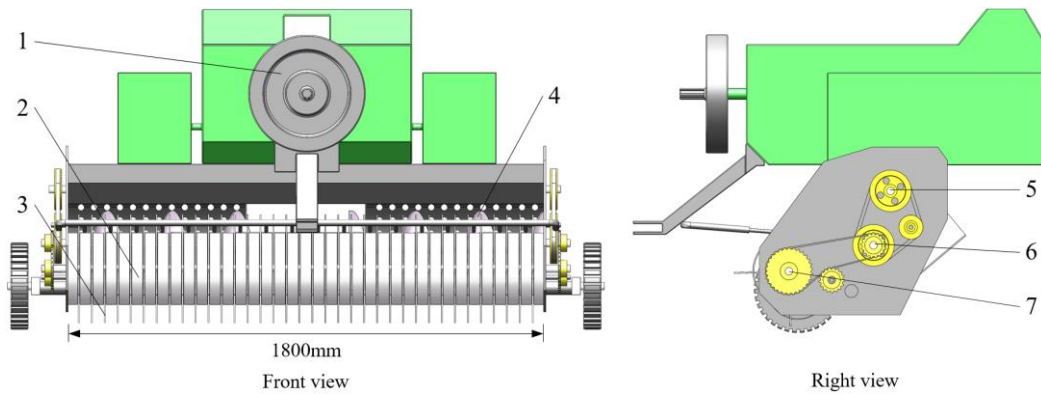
Structure diagram of square baler pickup platform: (1) flywheel; (2) pickup elastic teeth; (3) pickup plate; (4) screw conveyor; (5) power input shaft; (6) screw conveyor shaft; (7) picker shaft.
